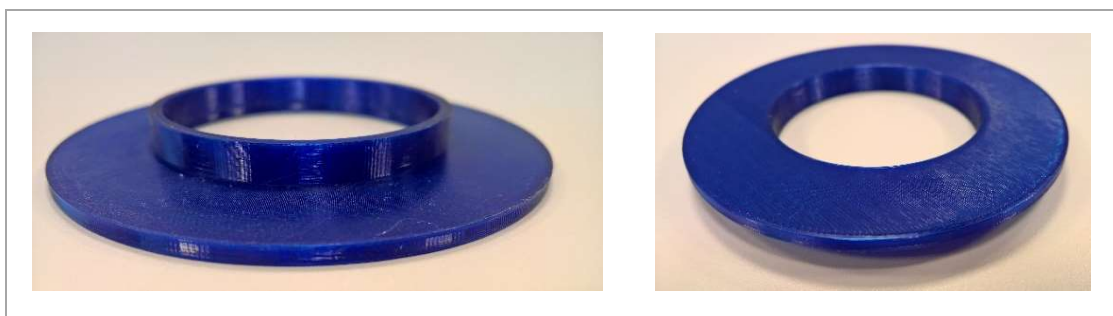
Real view of the centering ring for the capsule after 3D printing
